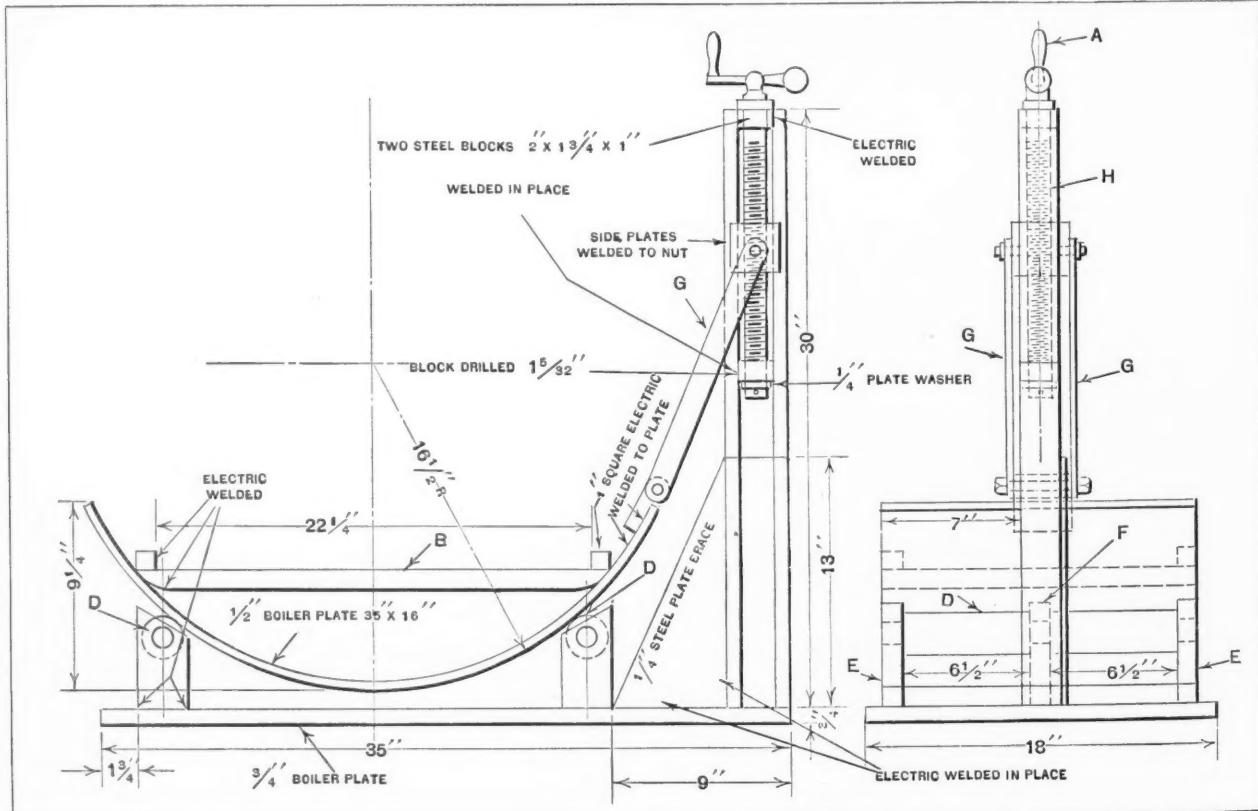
Details of Fixture which is Adjustable to Any Angle Required for Drilling Shell in Locomotive Driving-box
